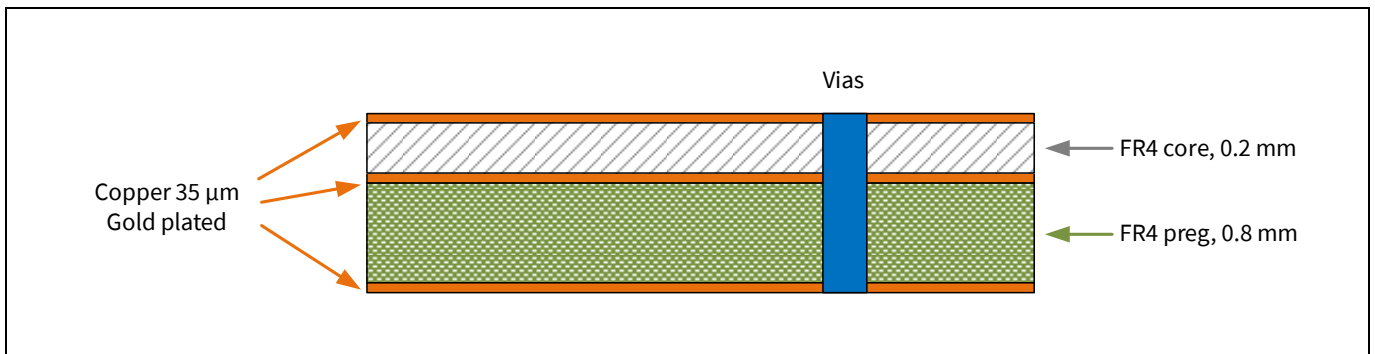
The PCB stack information for the evaluation board with PCB marking M101022
